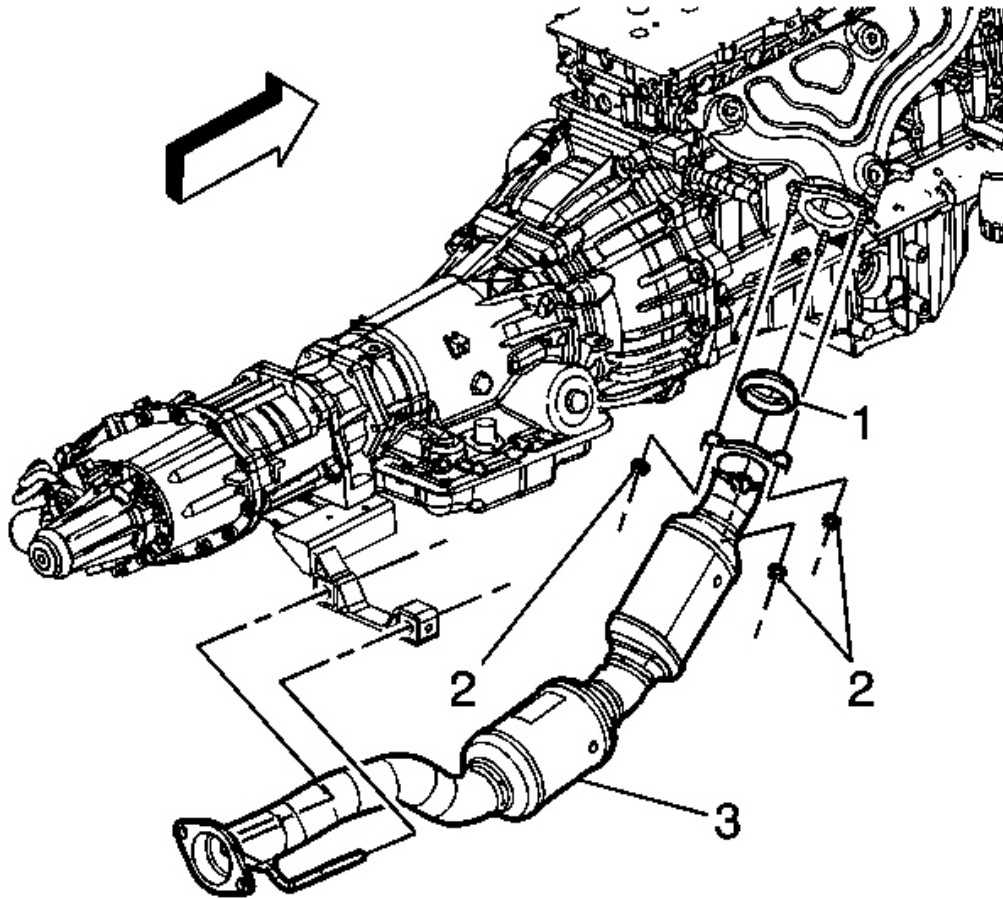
View Of Exhaust Manifold, Catalytic Converter, Sealing Ring & Nuts
